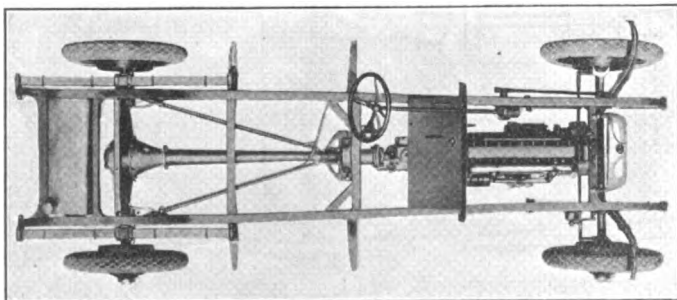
PLAN VIEW OF THE DUESENBERG CAR IN WHICH THE INTERNAL BRAKES ACT ON ALL FOUR WHEELS AND ARE ACTUATED HYDRAULICALLY
